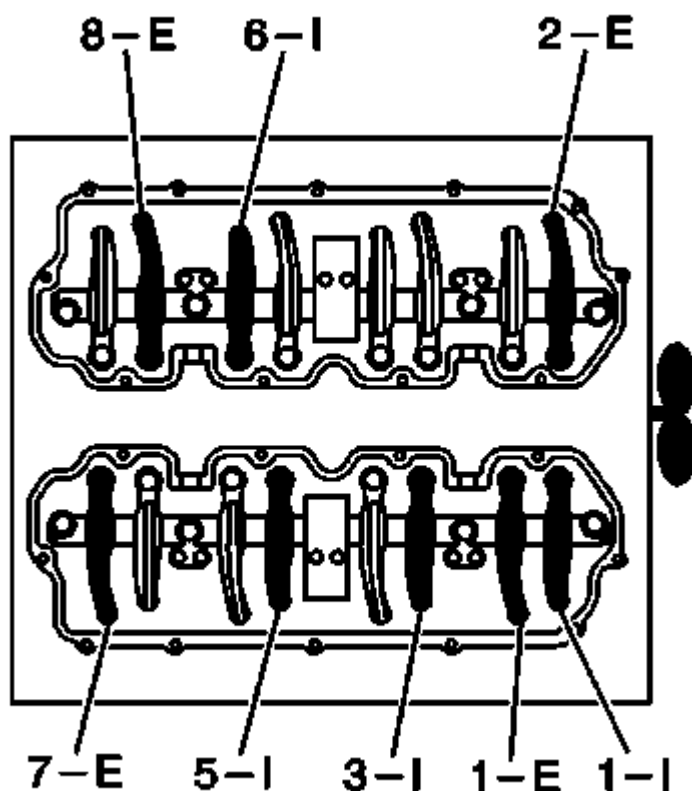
View Of Rocker Arm Intake & Exhaust Valves 1, 2, 3, 5, 6, 7 & 8
